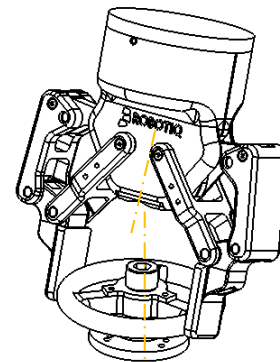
Valve turning using parallel jaw gripper with axis misalignment.
